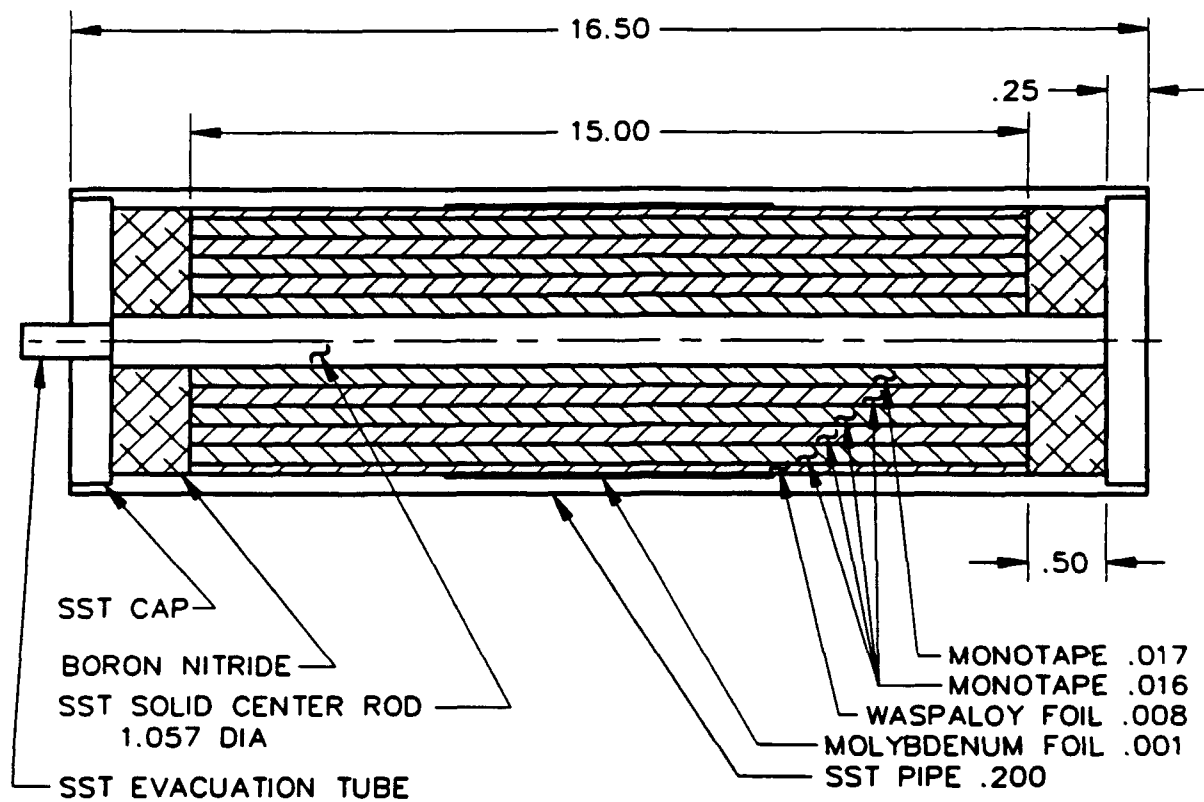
Tube No. 1, Design Details and Test Arrangement.
